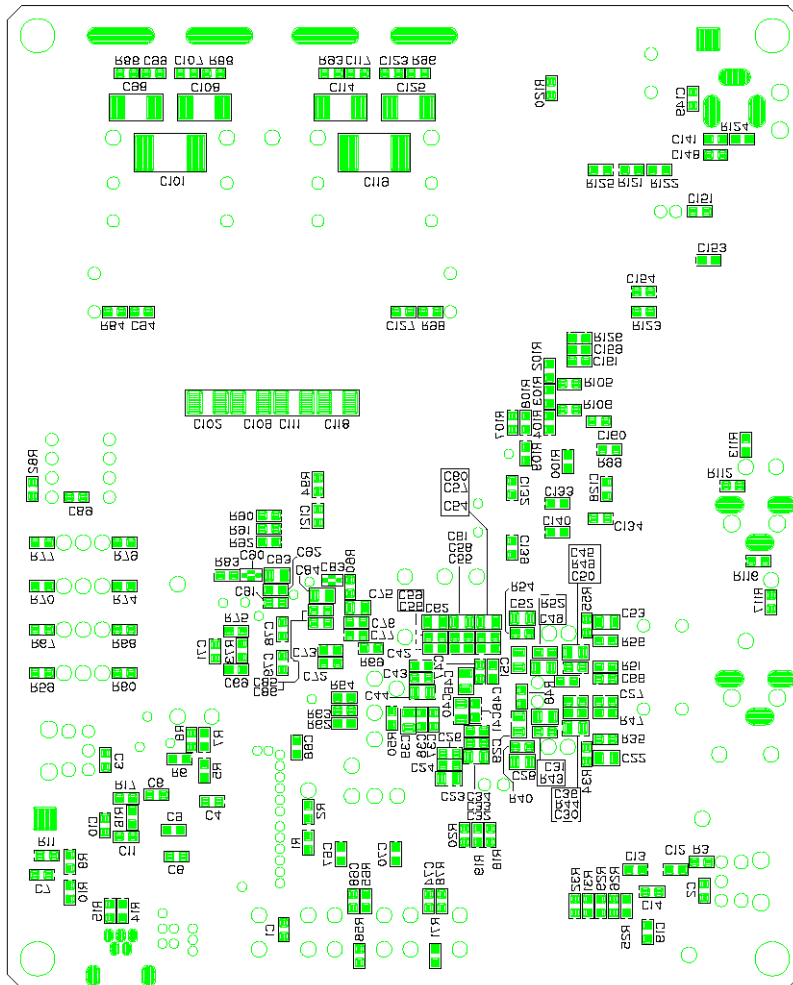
NJU26060 Demo Board (APC-005-1) Backside silk
